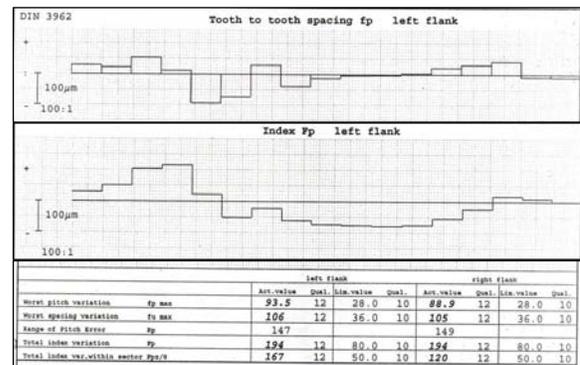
Tooth-to-tooth spacing error in carbon fiber reinforced Nylon 6/6 gear
